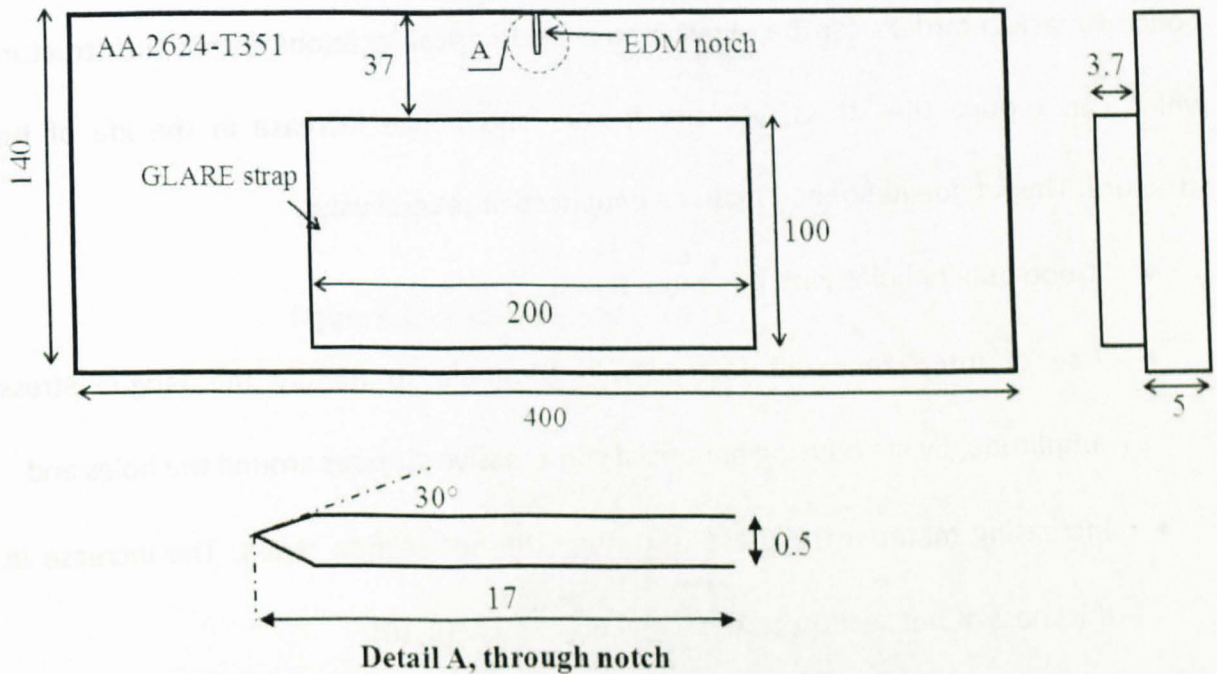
Geometrical details of SEN(T) specimen reinforced with strap
